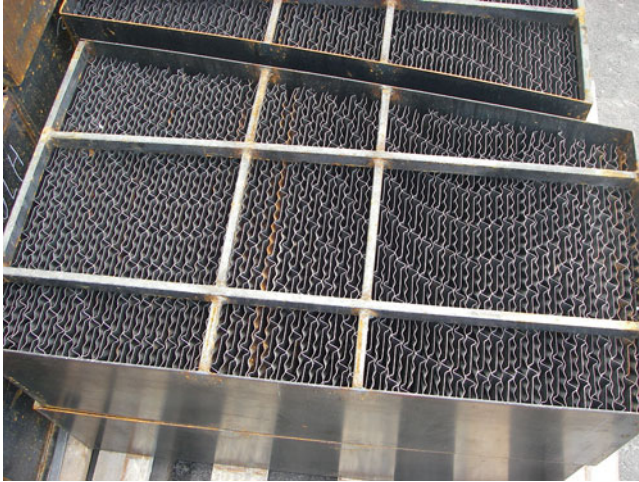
Assembled baskets for installation (Courtesy of Millmerran Operating Company, Australia)
